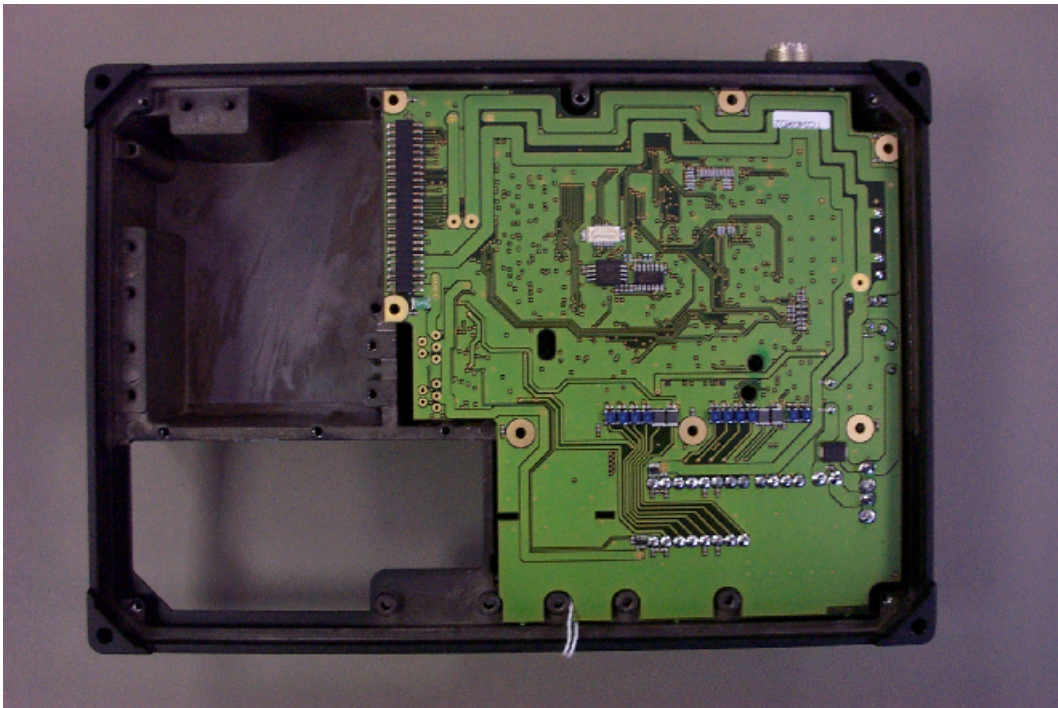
Interior View of Transceiver without Expansion PCB fitted
